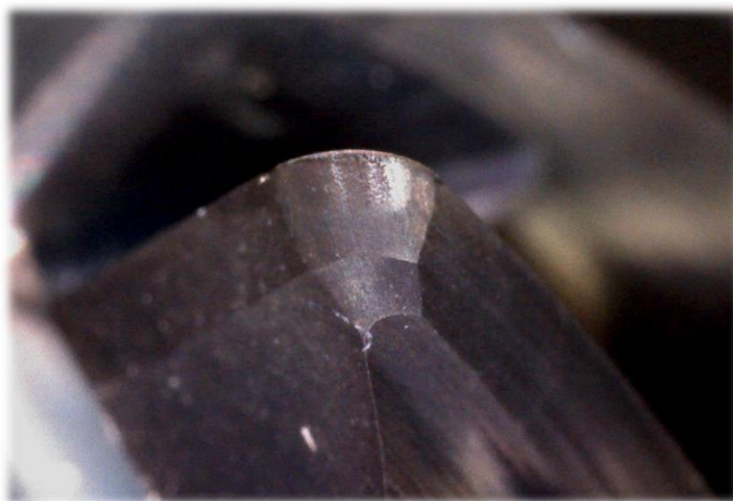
The cutting edge of a Z-Carb tool after it has been used to cut EN24T steel with steel settings
